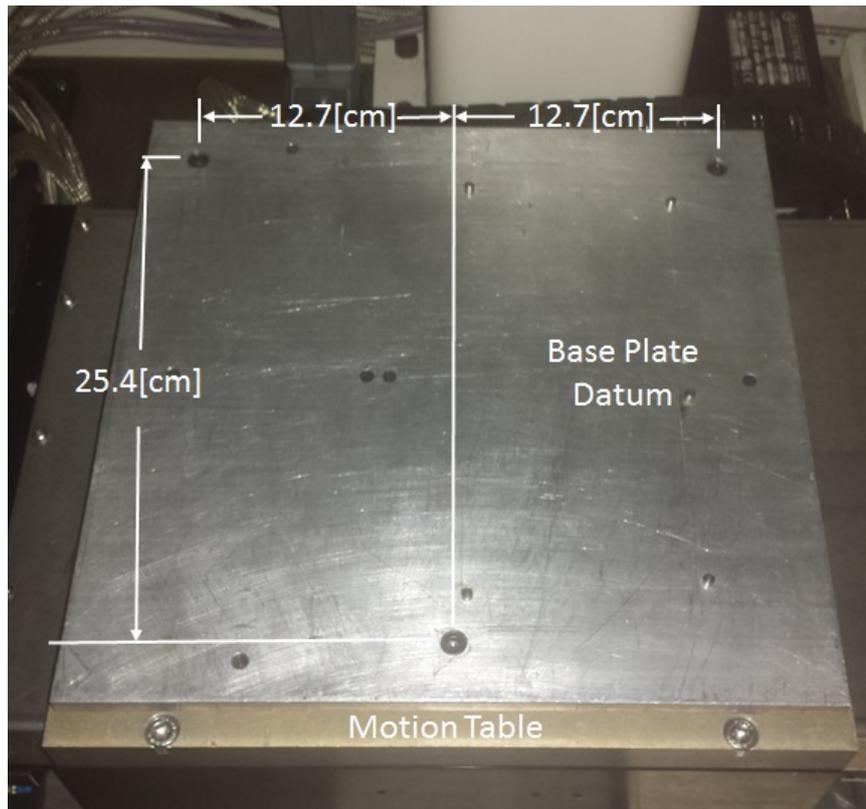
A typical base-plate datum made of 6061 Aluminum used for stainless steel and superalloy welding. Aluminum has a high thermal conductivity which prevents welded parts from sticking to the base plate. NOTE: Three holes with a diameter of 0.245[in] are required for mounting a plate on the stage. The bolt pattern is shown.
